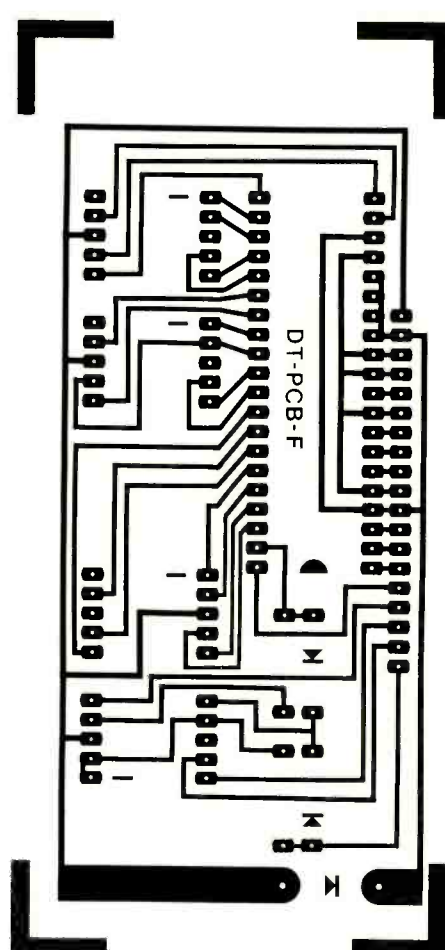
FULL-SIZE FOIL PATTERN for the front board. This board holds the clock IC and 7-segment displays.
